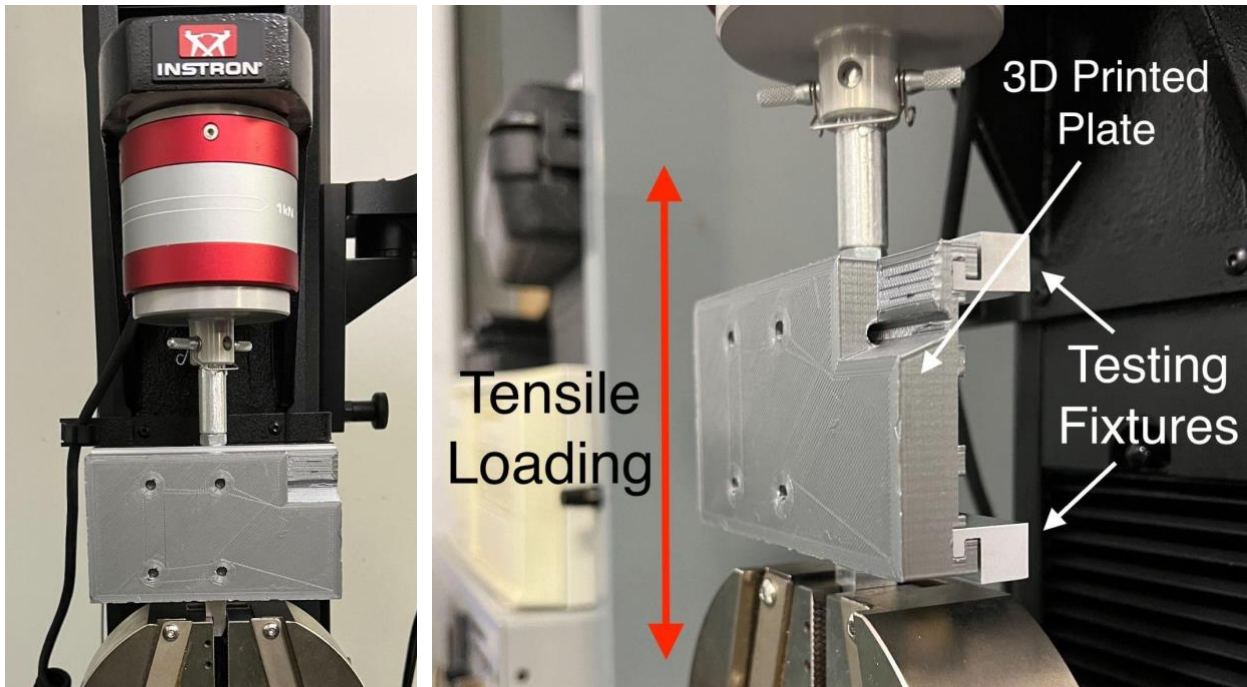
Two Views of the PLA Prototype Fixtured in the Instron Tensile Machine
